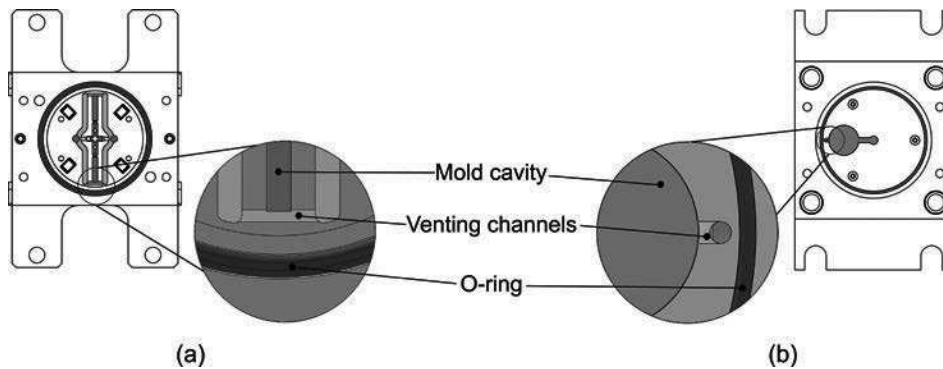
Venting channels machined (a) in the mold assembly and (b) in the cavity plate
